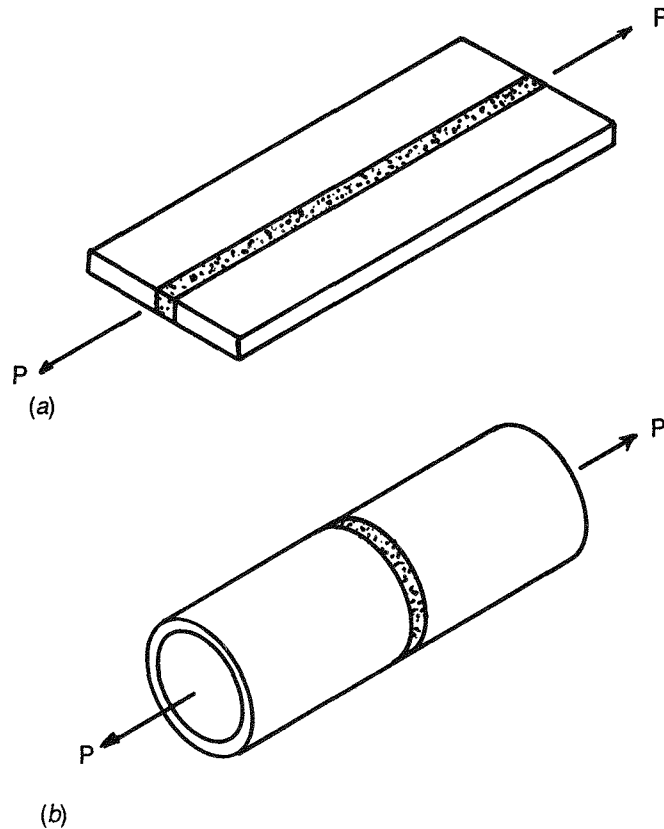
Structural weldment types used in creep-rupture tests.
